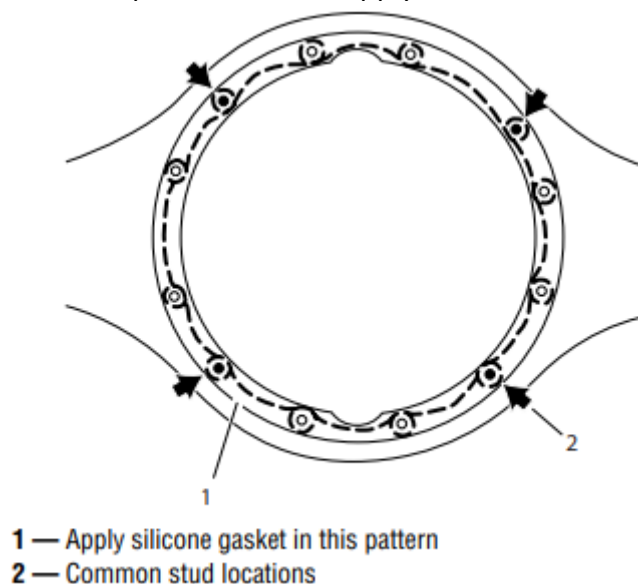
Apply Spicer approved RTV compound on axle housing mating surface
